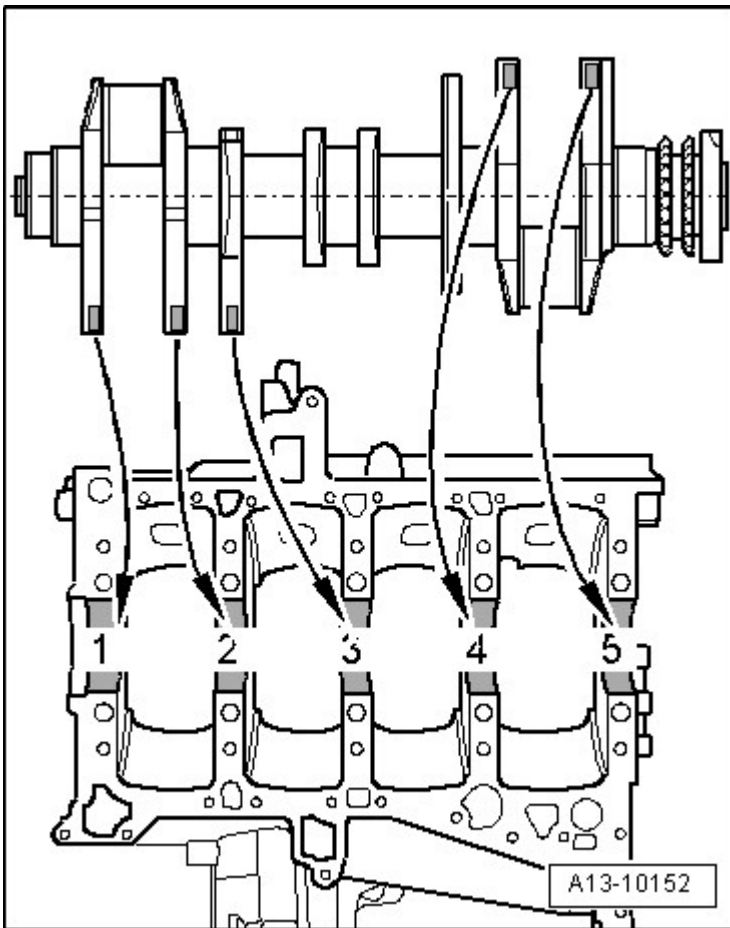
Allocation Of Crankshaft Bearing Shells For Guide Frame - Crankshaft Manufactured By Alfin
